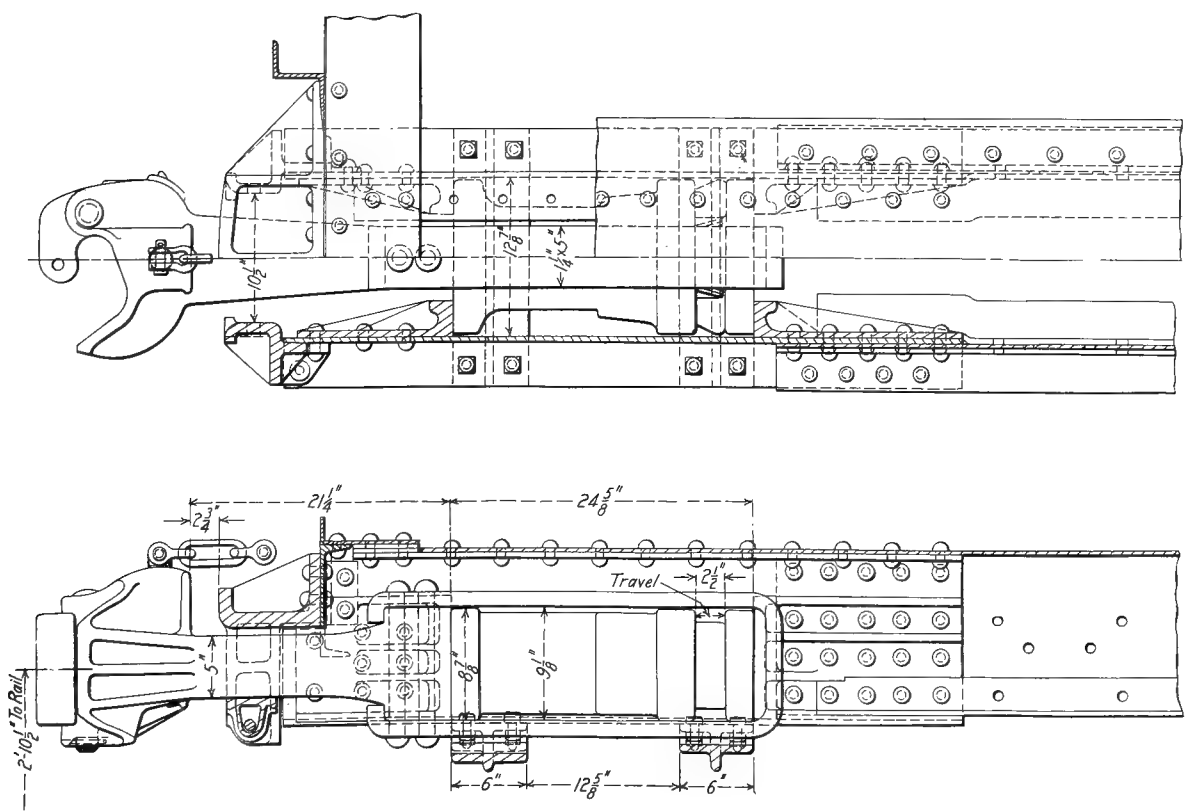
Application of Gould Friction Draft Gear to Steel Underframe Freight Cars.
